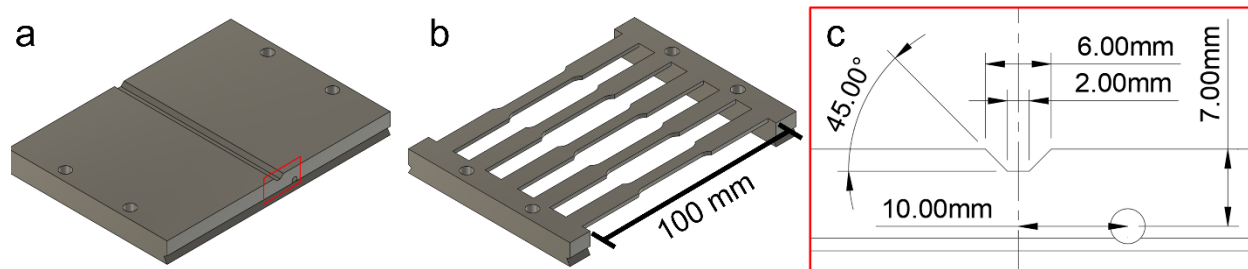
Drawing of the trapezoidal groove cross section and thermocouple location with dimensions.
